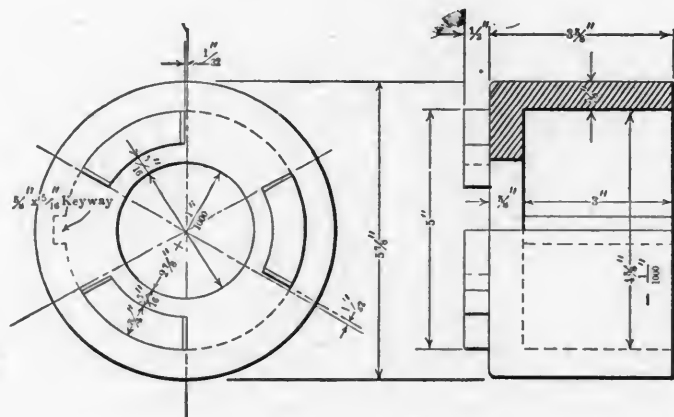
SPECIAL SLEEVE CLUTCH KEYED TO THE HUB OF GEAR NO. 2 OF THE 42-IN. NILES LATHE.
